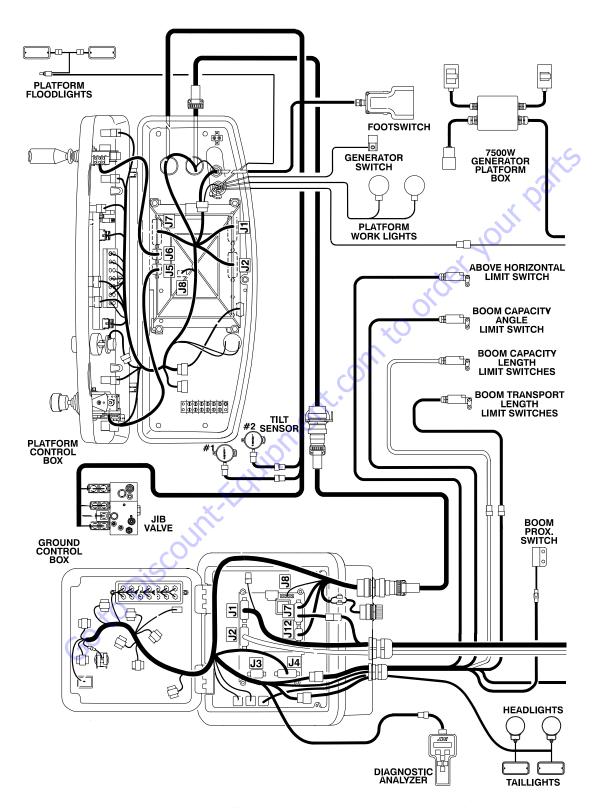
Electrical Components Installation (WITH UGM) (SN 0300140000 through 0300182743 and SN B300000100 through B300001091) - Sheet 1 of 2
